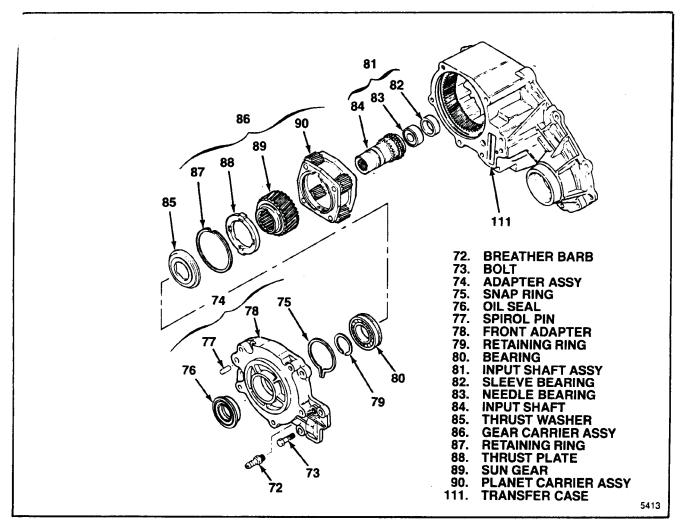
Adapter, Input Shaft and Gear Carrier Group
